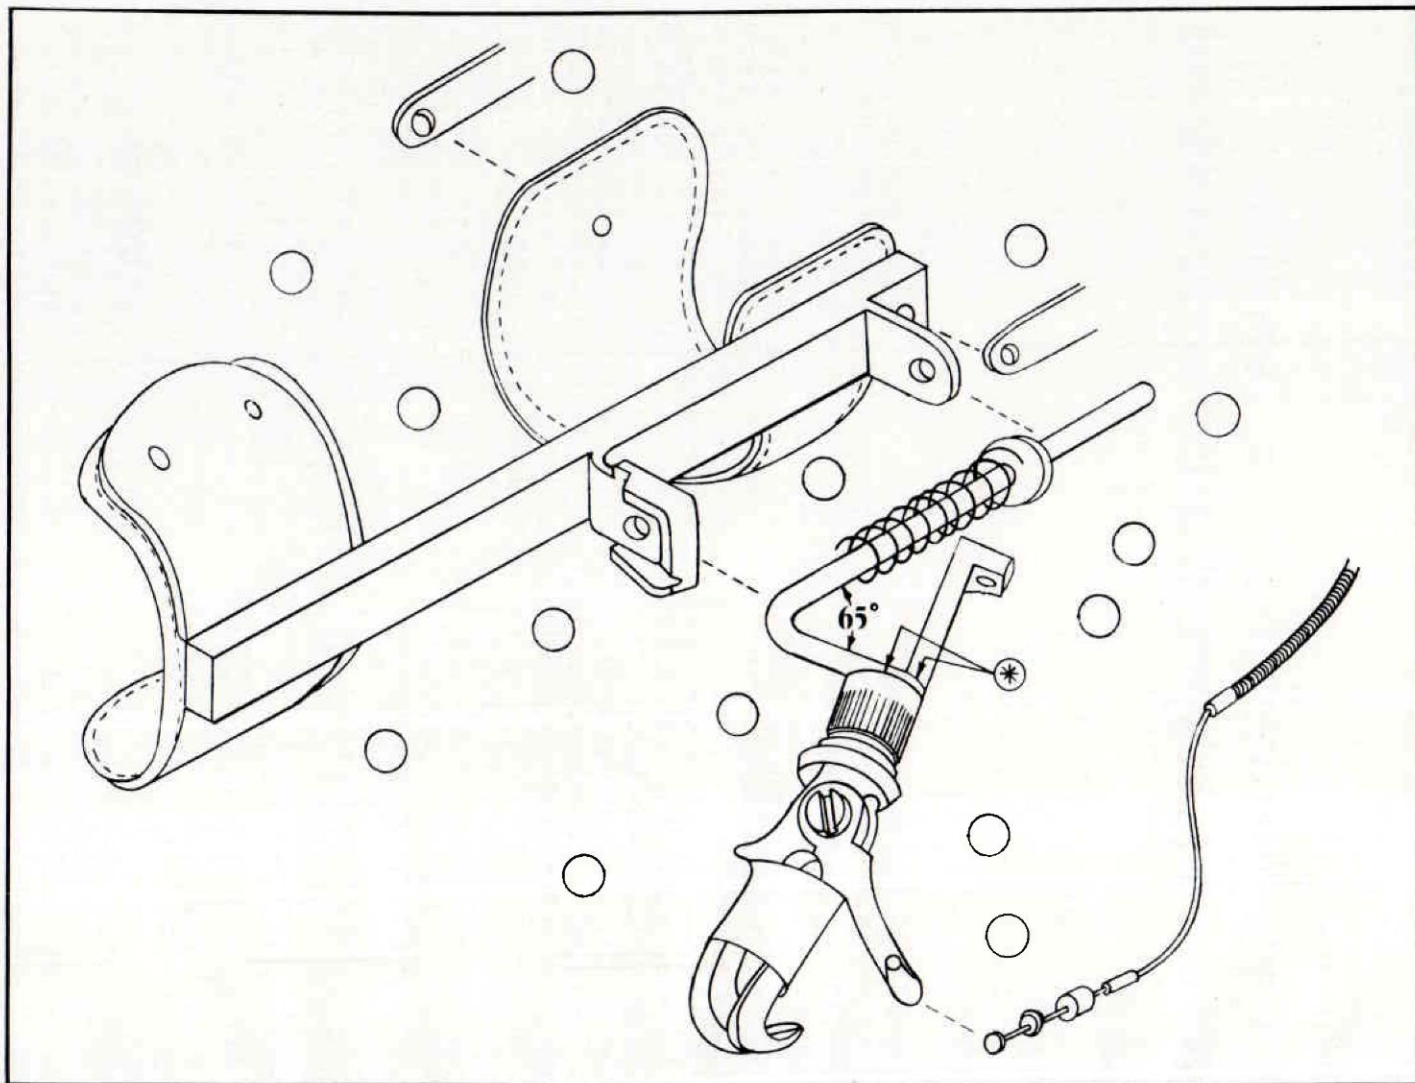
Exploded isometric drawing of the orthosis emphasizing the hand, rotating rod, and arm attachment assembly.
